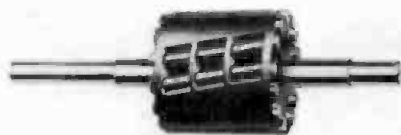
A. Squirrel-cage motor armature showing the copper rods, rings, and salient poles. (Courtesy, Bodine Electric Co.)
